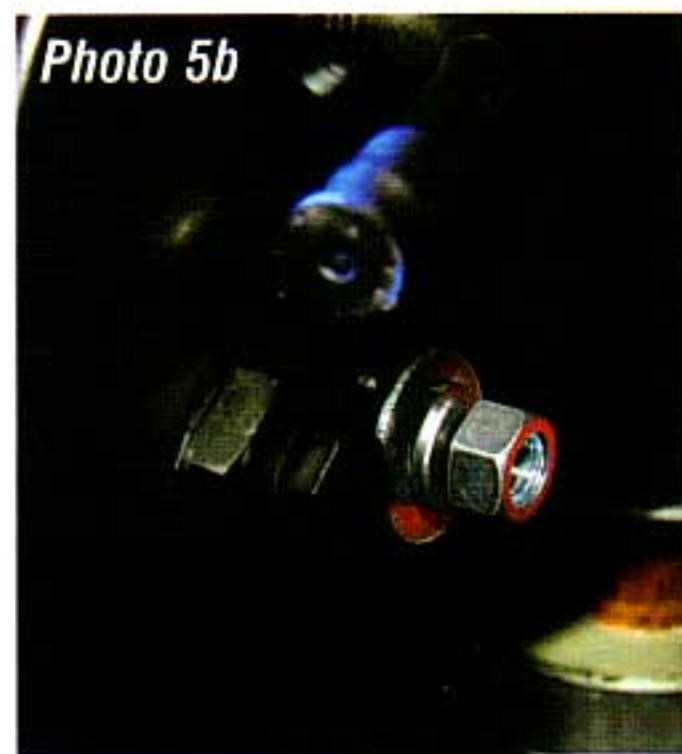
& 5b: The power steering pump P/N 53-28 mounts to the bracket using a 9/16" X 1" bolt and lock washer on the front and a 9/16" nut, lock washer and flat washer on the rear stud of the power steering pump.
